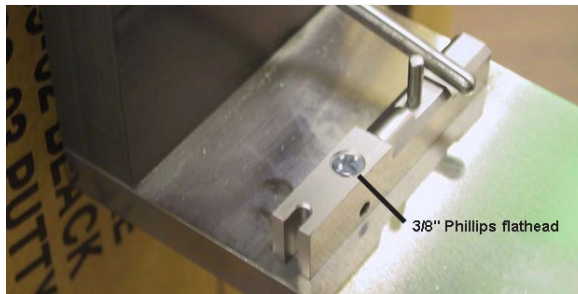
Crack Seal Option Installation (note probe location and cut-out area for beam placement)
